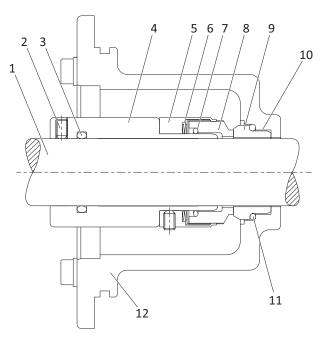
Design of the relieved mechanical seal with sinusoidal spring
